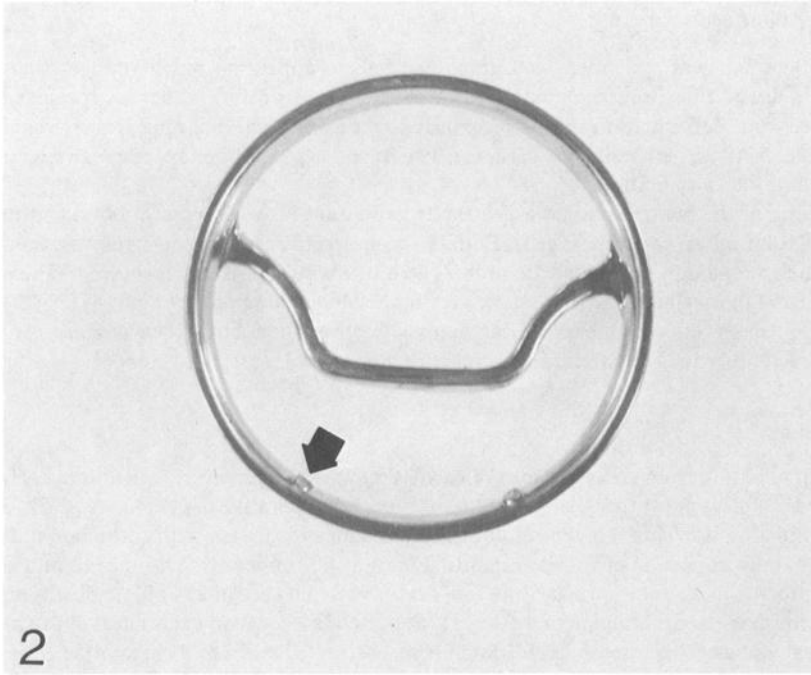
Annular ring of prosthesis after removal from heart with intact inlet strut. Fractured outlet strut at arrow ( $\times 3$  actual size).
